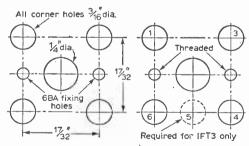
The chassis drilling dimensions for the coilformer bases.
